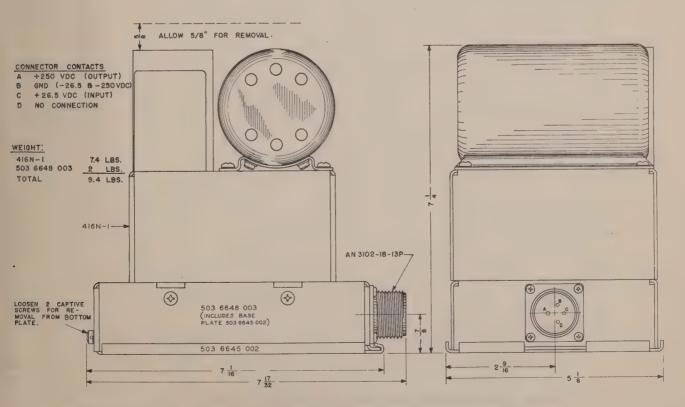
416N-1 Power Supply and 503 6648 003 Mounting Base
